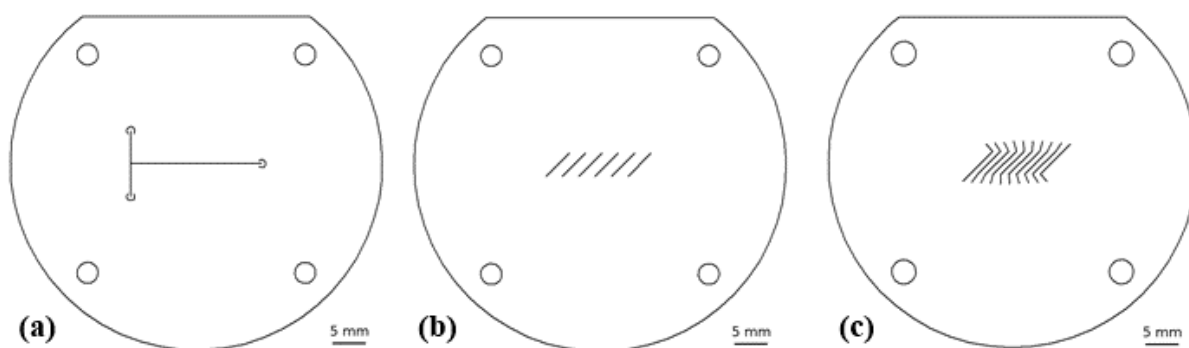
(a) toolpath for cutting electrode A, (b) toolpath for cutting electrode B, (c) toolpath for cutting optimized electrode B
